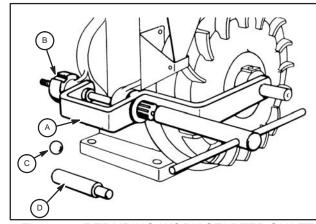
REPAIRING WORN STARTER SHAFT HOLE
